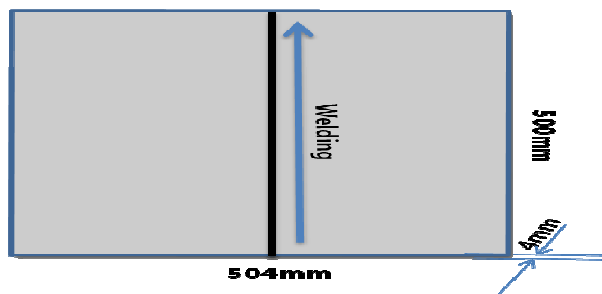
Schematic illustration of butt welded plate geometry
